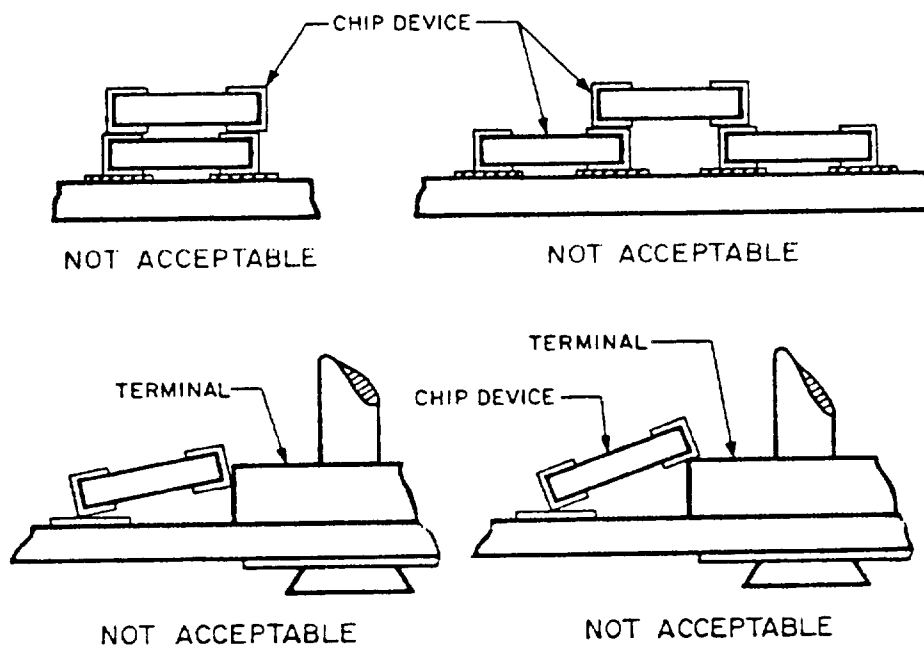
Improper mounting of chip devices (see 5.3.19.8.1).
